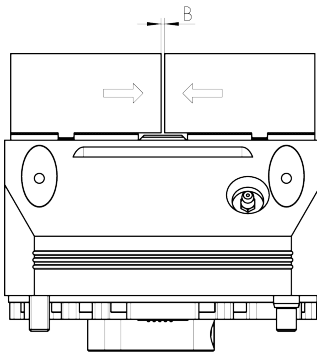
"Closed" clamping force block - Teach position 1, O.D. clamping
